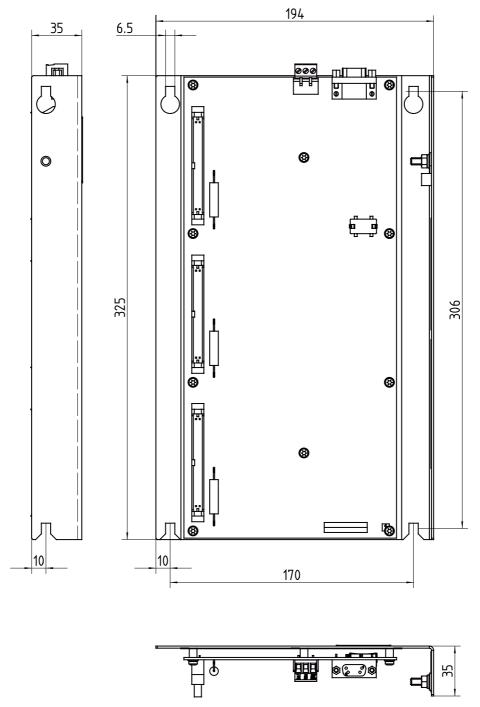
PP72/-48 peripheral module dimensional drawing
